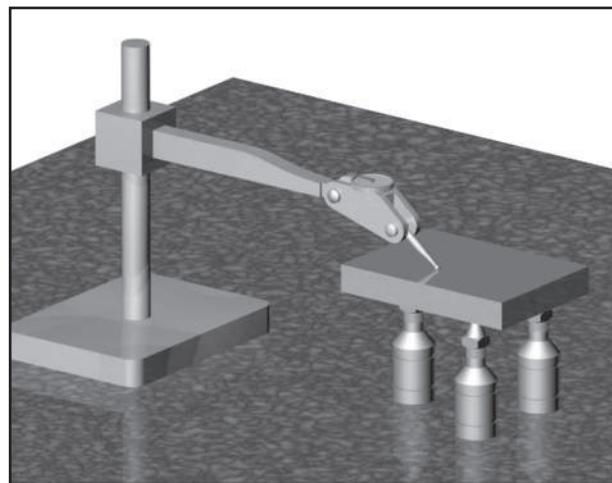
illustrates one method for inspecting flatness. Moving a dial indicator over the surface is time-consuming, but this type of inspection method is fairly good. The full indicator movement (FIM) reading must not exceed the total flatness tolerance.
